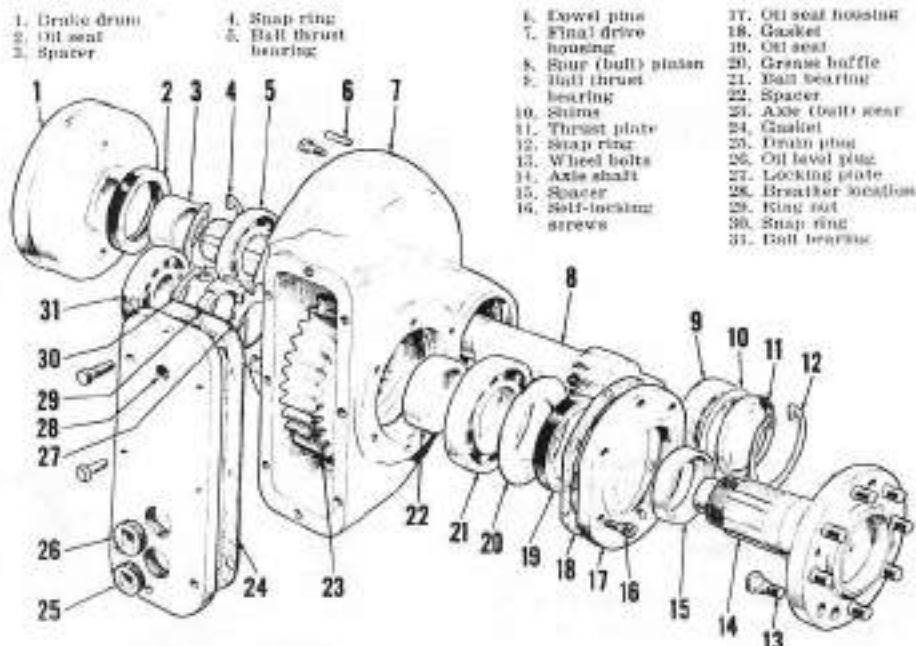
Exploded view of final drive assembly for models 780 and 3800. Bearings for both pinion and axle shafts are ball bearing type whereas all other models are equipped with taper roller bearings. Adjust thrust type pinion bearings for 0.001-0.003 shaft end play by varying shims (10). No adjustment is provided for axle shaft bearings.
